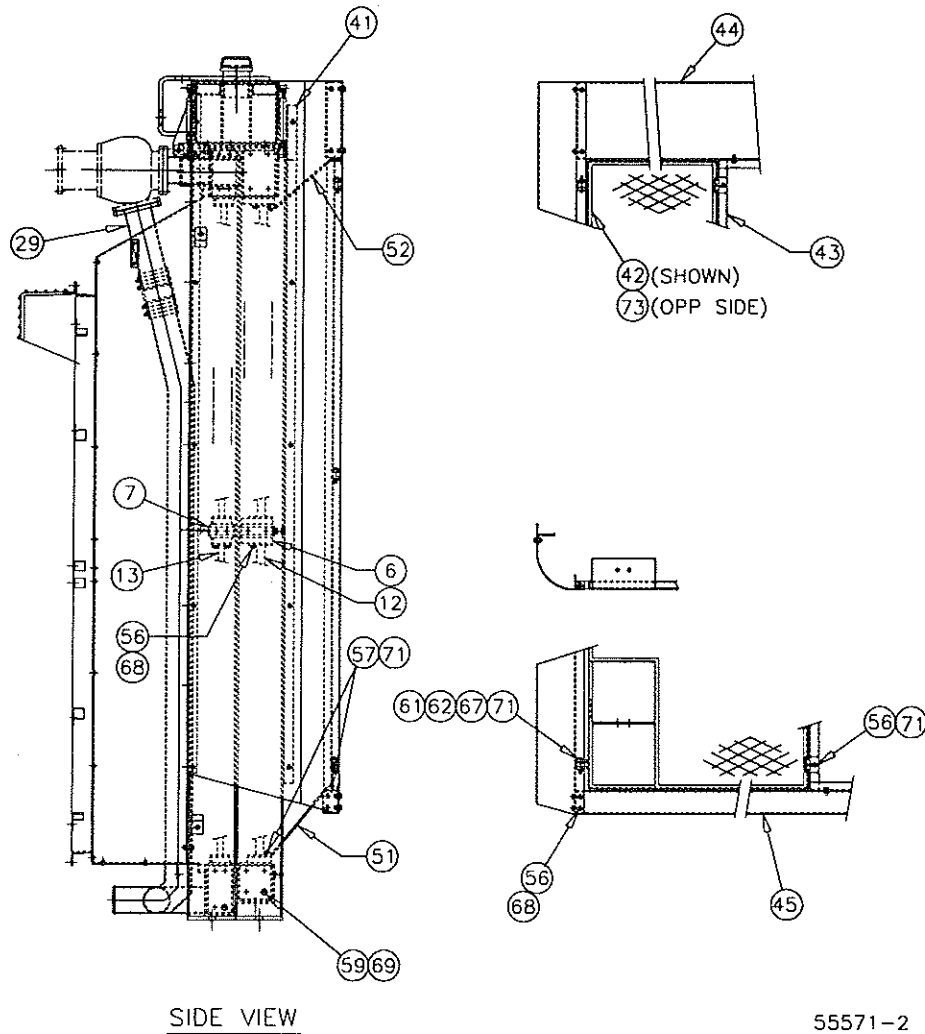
TYPICAL RADIATOR ASSEMBLY (CONTINUED)
